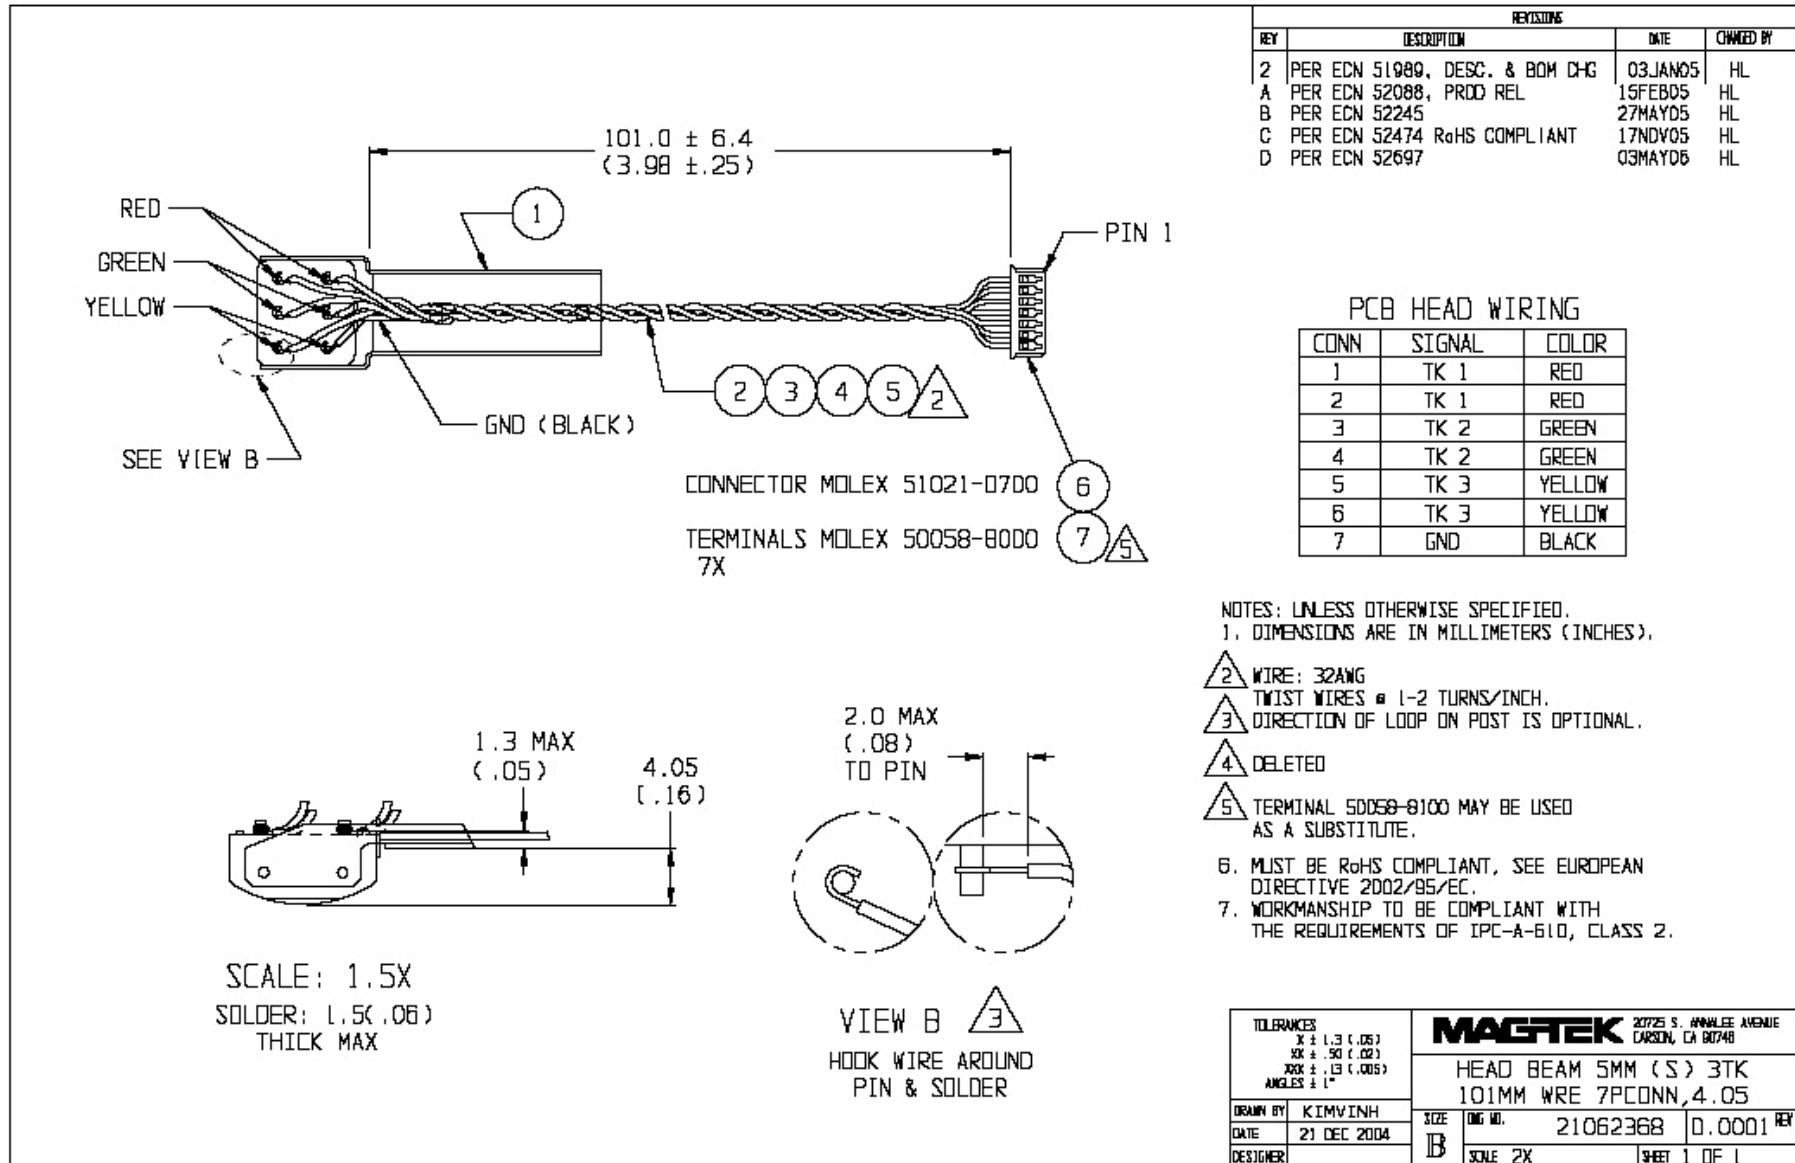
3-Track Read Head on Beam Assembly with Cable and 7-Pin Connector
